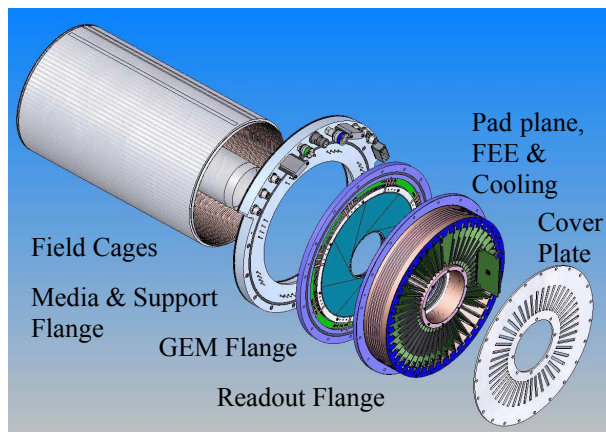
Exploded view of the FOPI GEM-TPC revealing its modular design.
